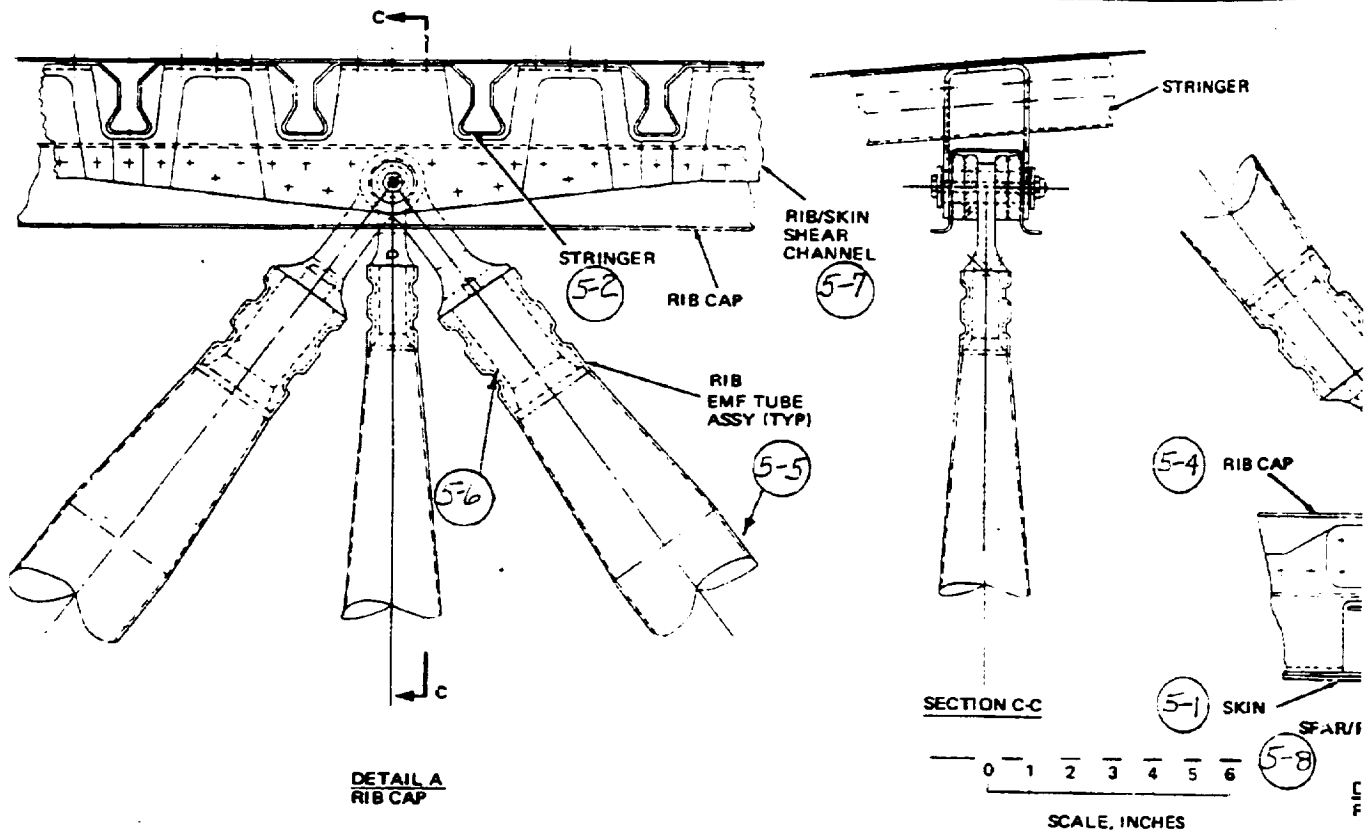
Wing Structure Subsystem Structural Arrangement
